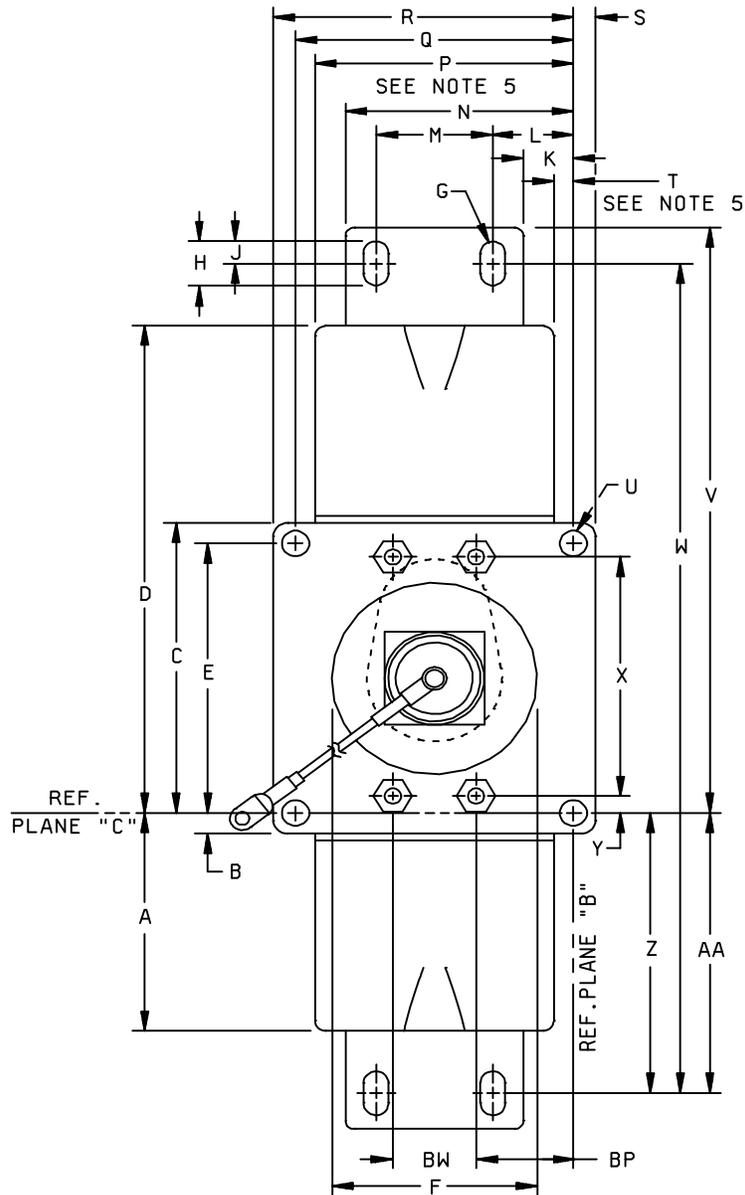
Outline drawing of electron tube type 7156A - Continued.
